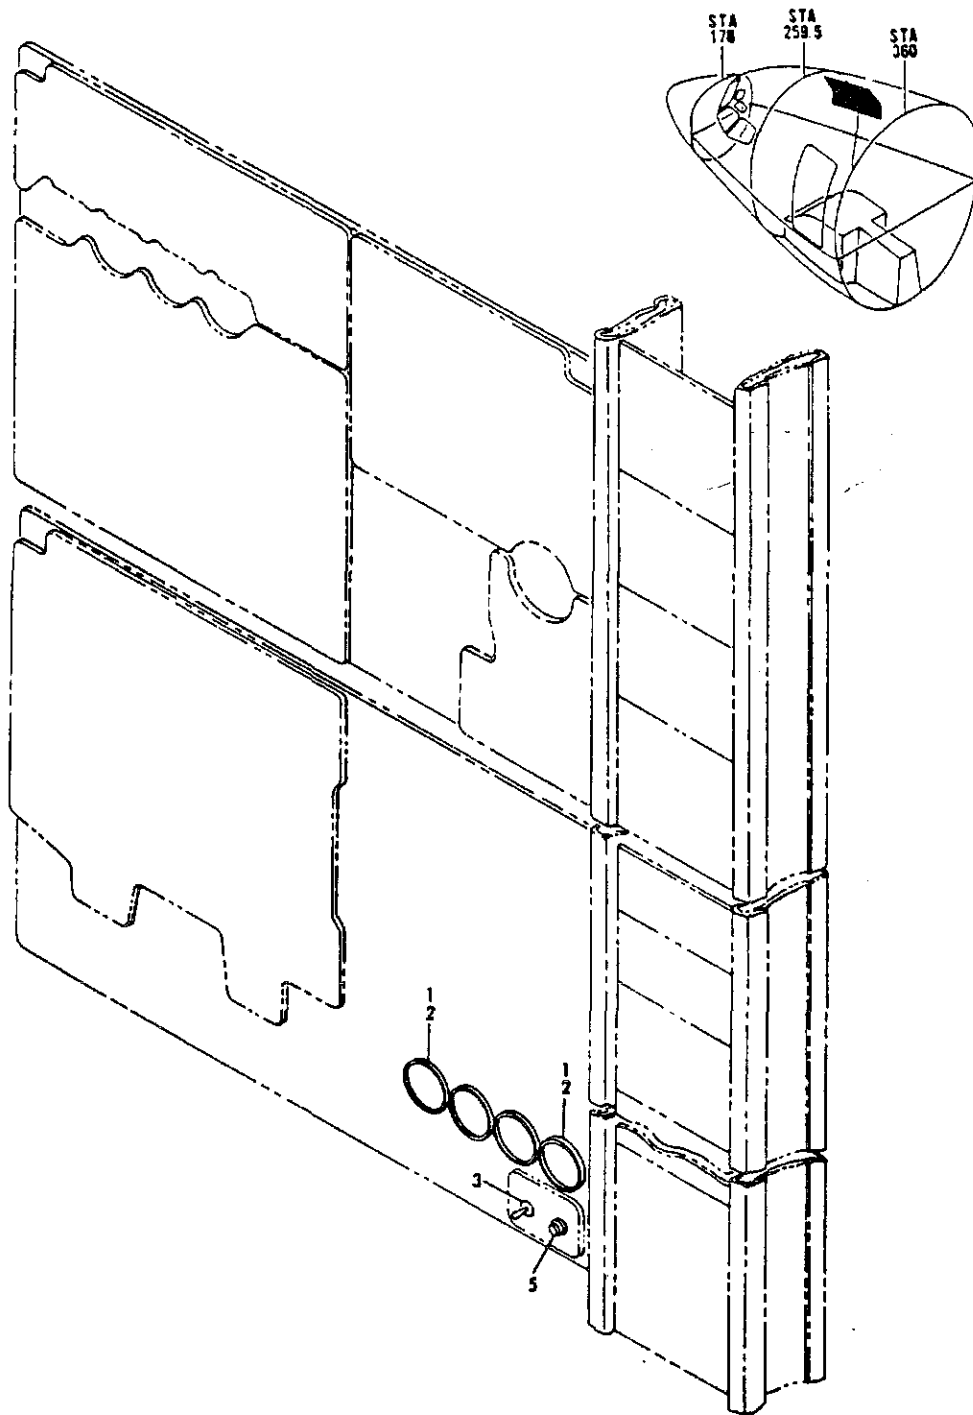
M. PANEL INSTL, FLIGHT ENGINEERS LOWER (ENGINE INDICATING ONLY)
